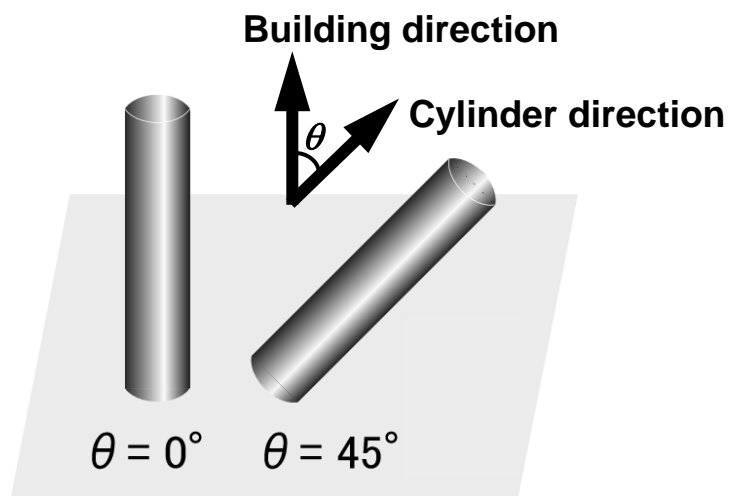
Schematic drawing of cylindrical bars fabricated by EBM.
